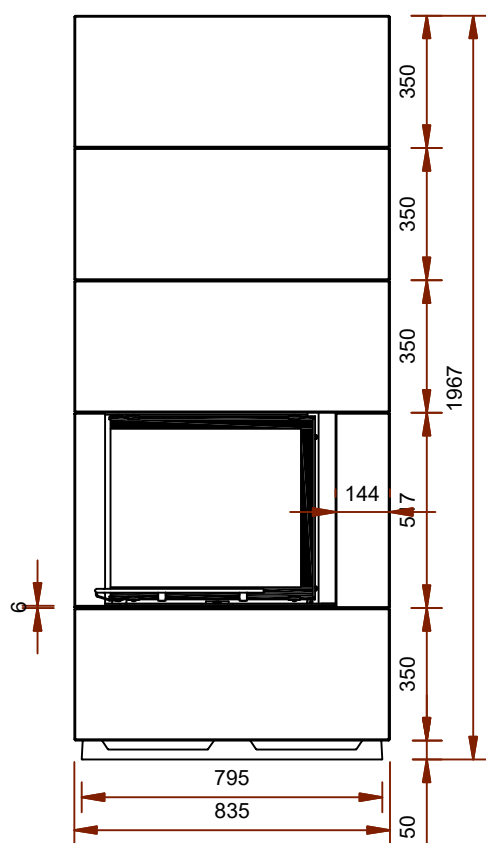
top mounted heat exchanger Set 3 storage rings and top part 2, H 350 mm | Surface finish: Camina concrete paint
